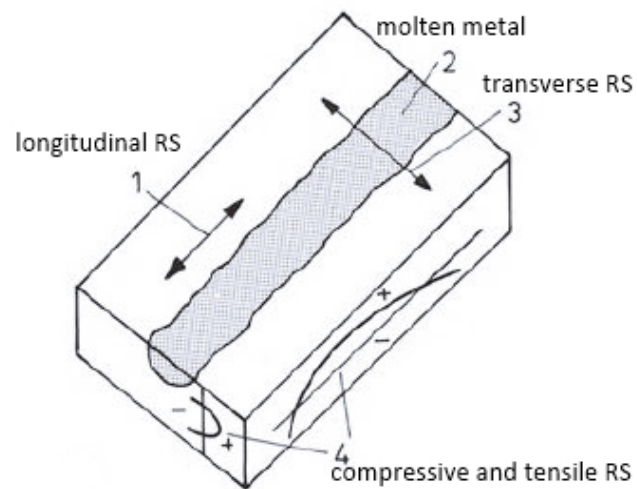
Residual stress due to welding. Adapted from (Noyan and Cohen 2013)
